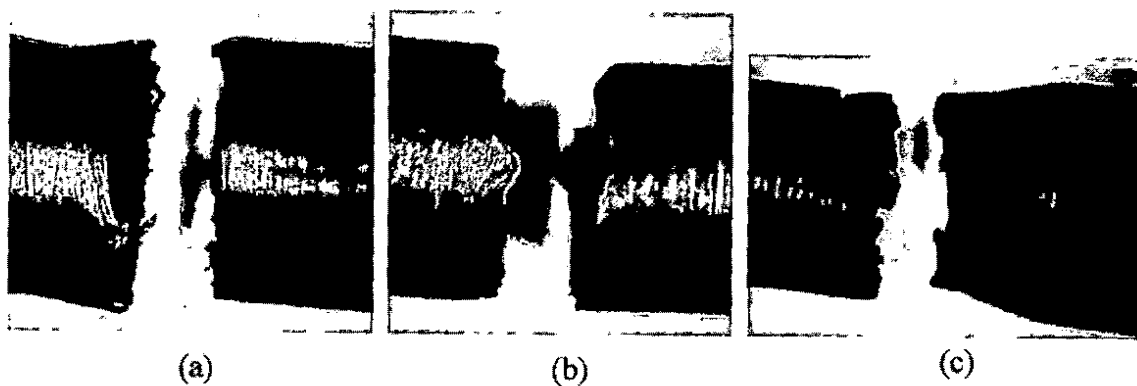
Side view of fracture surfaces of smooth specimens from tensile experiments at (a) 0.5 mm/s, (b) 0.05 mm/s, and (c) 0.005 mm/s.
